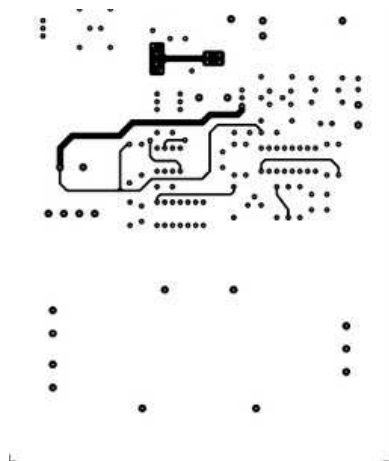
2: Drawing to scale 1, double-sided PCB with plated through holes of the plate regenerator CRT EN1659 side components.
